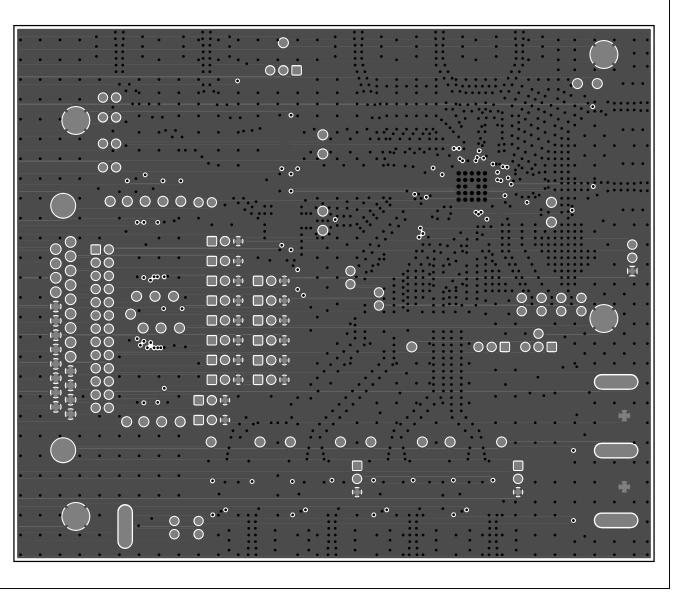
MAX2839AS EV Kit PCB Layout—Inner Layer 2 (Ground Layer)
